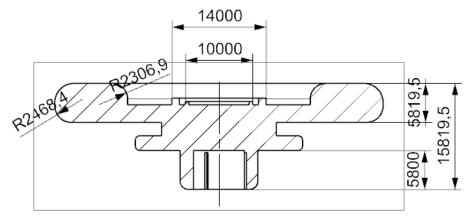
Side view of the counter weight with dimensions (mm) [own source].
